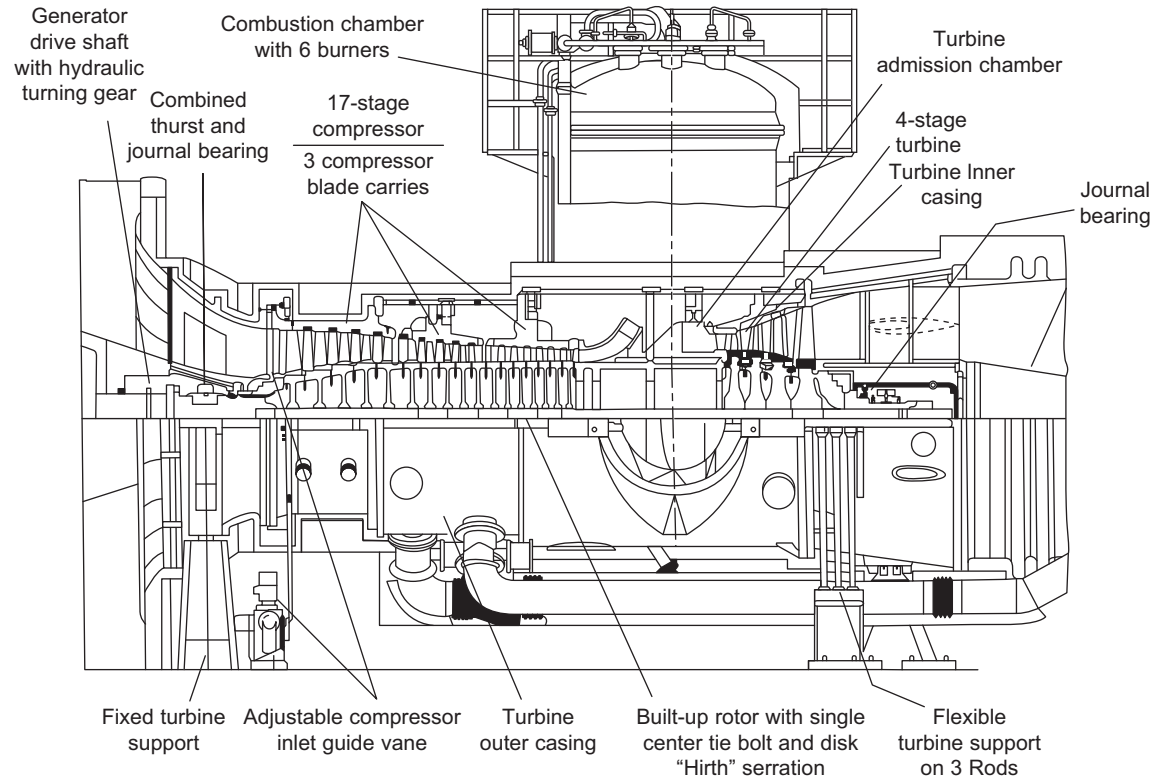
Longitudinal section of the Siemens/KWU gas turbine.
